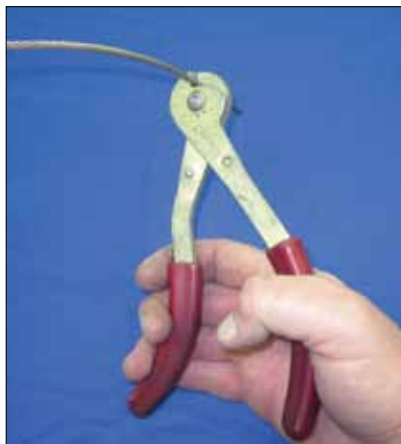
Trim the end of the cable with a cable cutter so it is not frayed.
